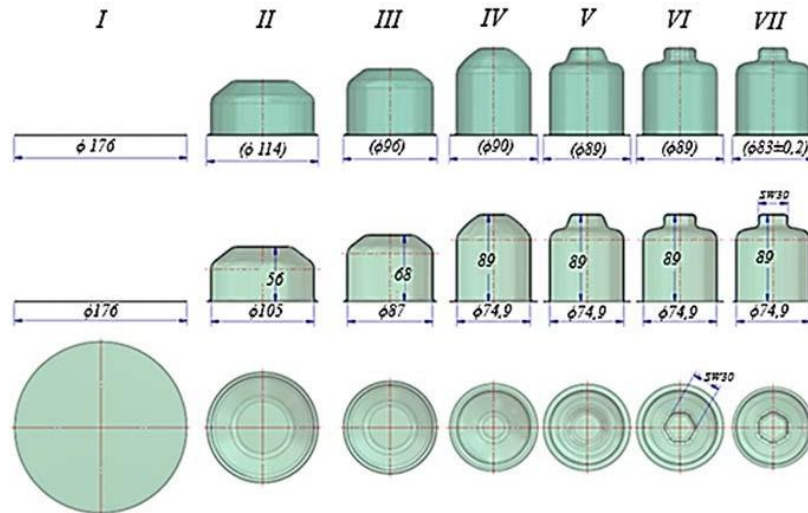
Shapes and dimensions of the workpieces by stages of forming [5]
